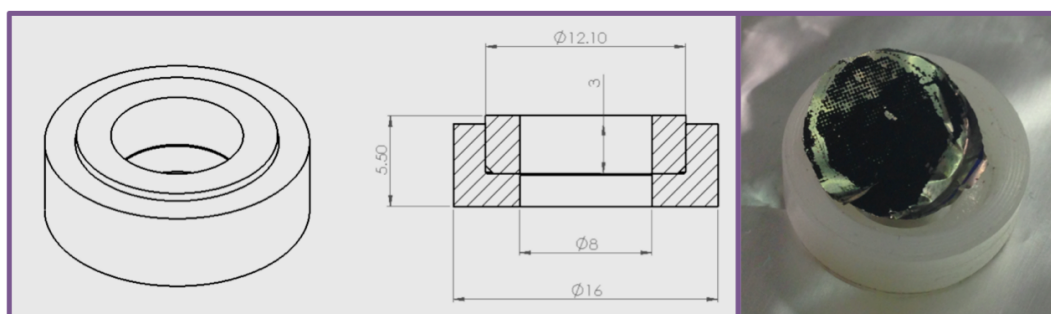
On the left: Dimensions of the samples provided by the AVL. On the right: Diesel particulate filter sample with carbon layer that was measured in the Como slow positron beam
